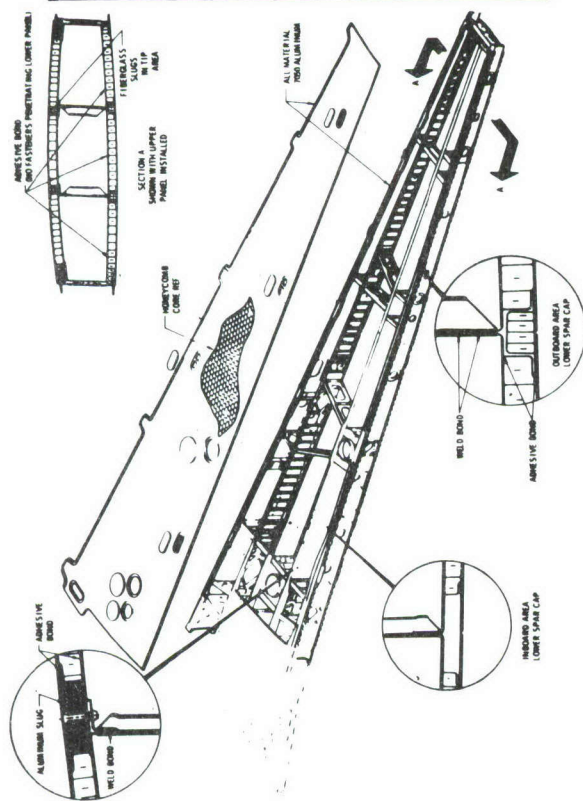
Adhesive Bonded Aluminum Honeycomb Panels (Sheet 1)
